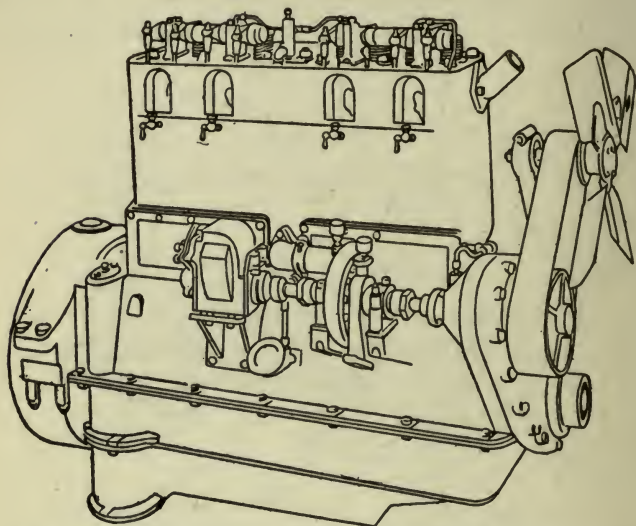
INCLOSED FOUR-CYLINDER VALVE-IN-THE-HEAD 40-HORSE POWER STEARNS ENGINE
